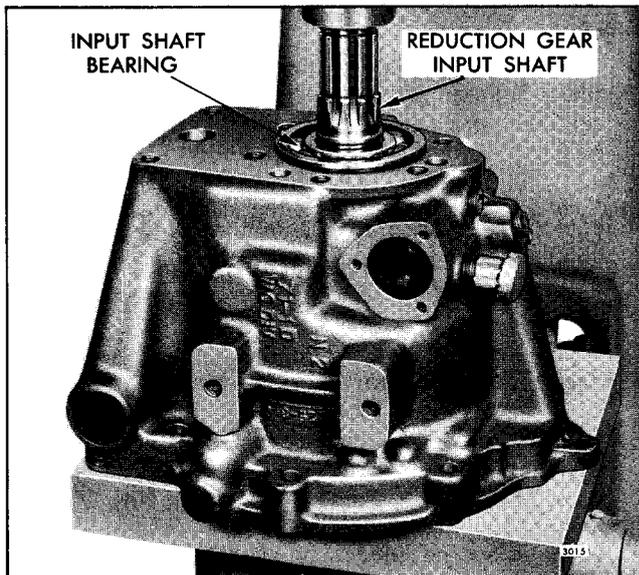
Removing Reduction Gear Planetary Gear and Input Shaft Assembly from Input Shaft Bearing (2.5:1 and 3:1 Ratios)
